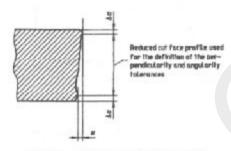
Definition of measuring area for perpendicularity and angularity tolerances
